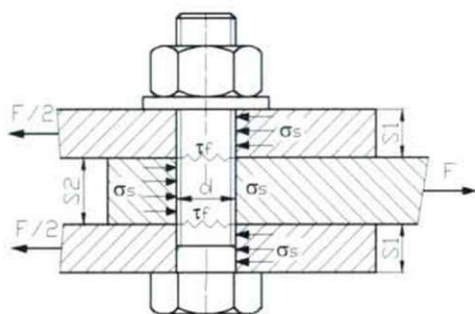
Assembly with screws mounted without clearance, loaded with transversal forces
